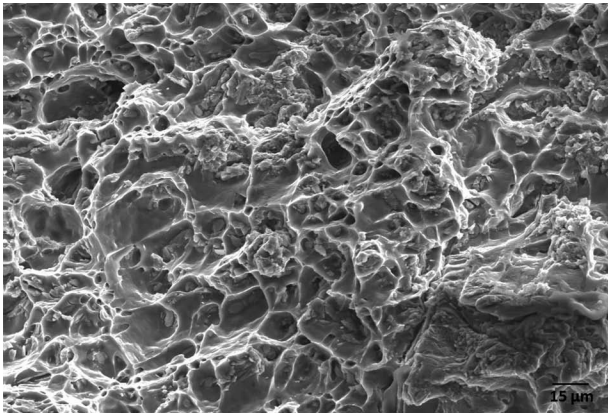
Another view of the fracture surface, shown in Fig. 121 taken at higher magnification
